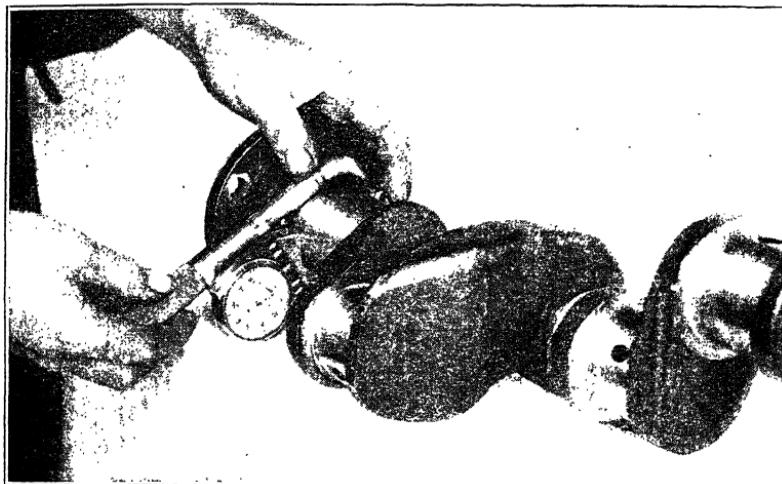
Using Crankshaft Gauge to Test Crankshaft Mains and Crank Pins for Taper and Out-of-Round
